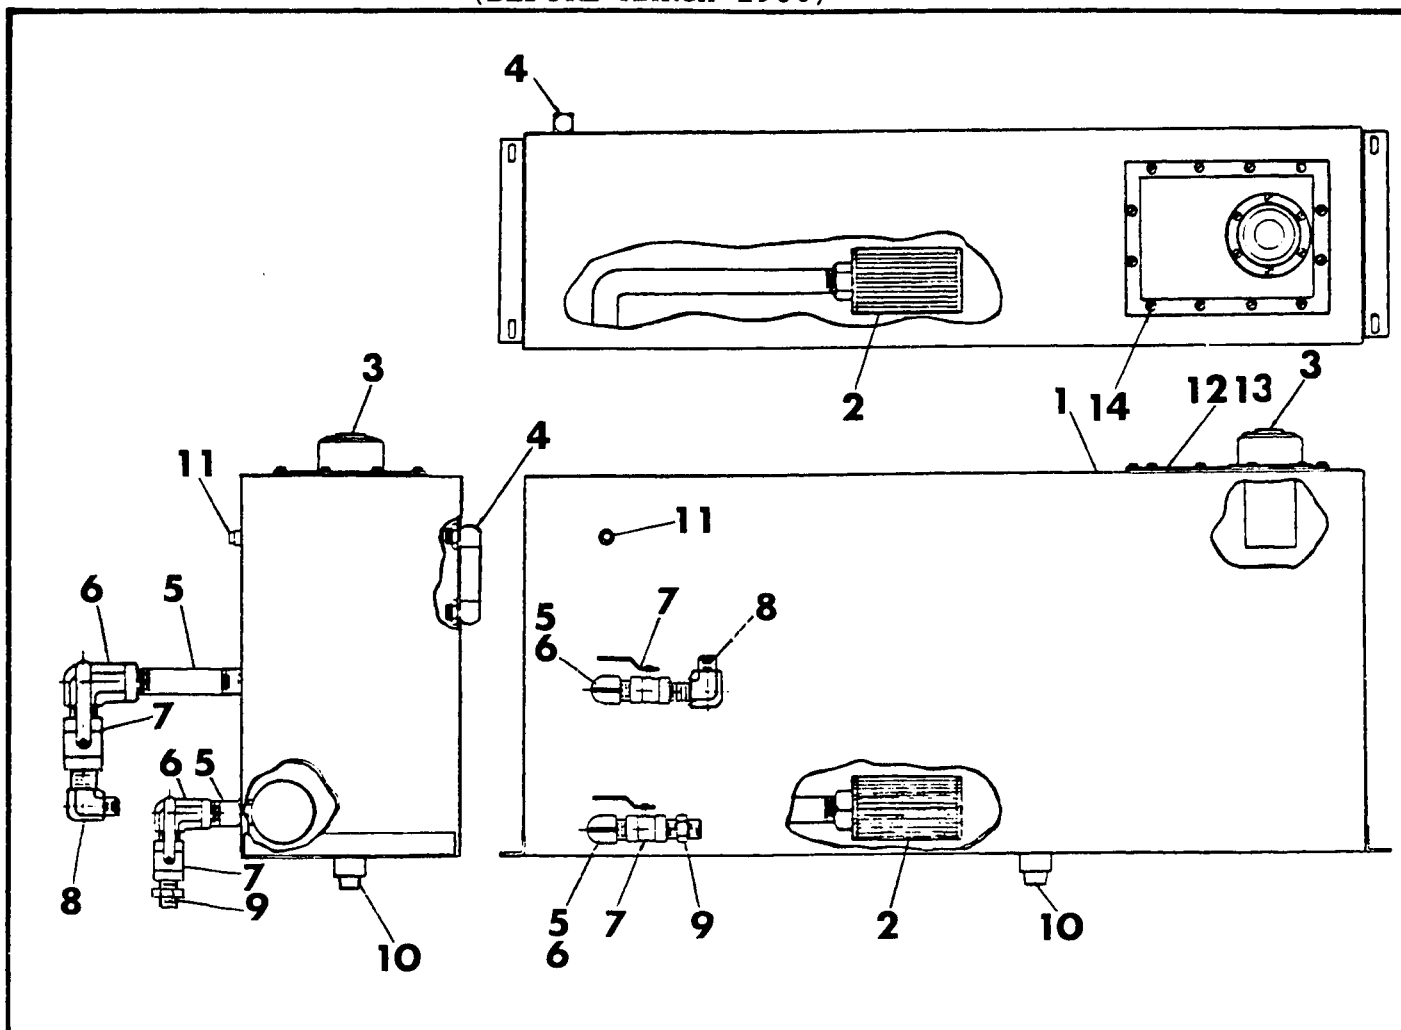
B.1 - HYDRAULIC TANK ASSEMBLY (RT26E)
